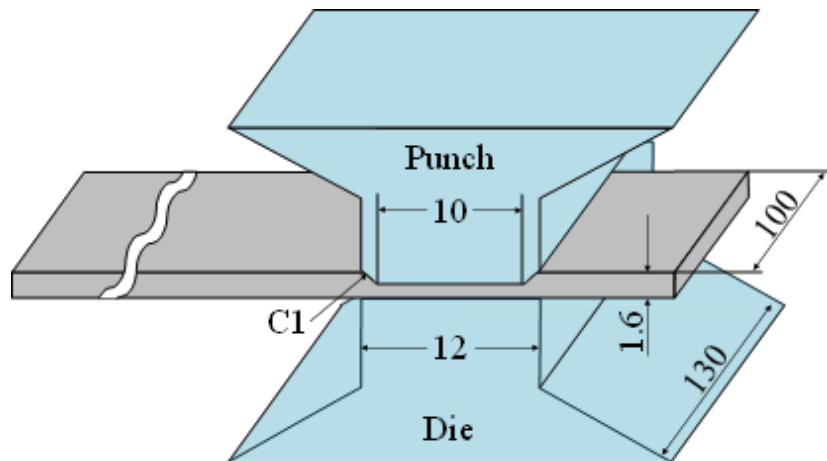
Dimensions of punch, die and JSC1180YN UHSS sheet
